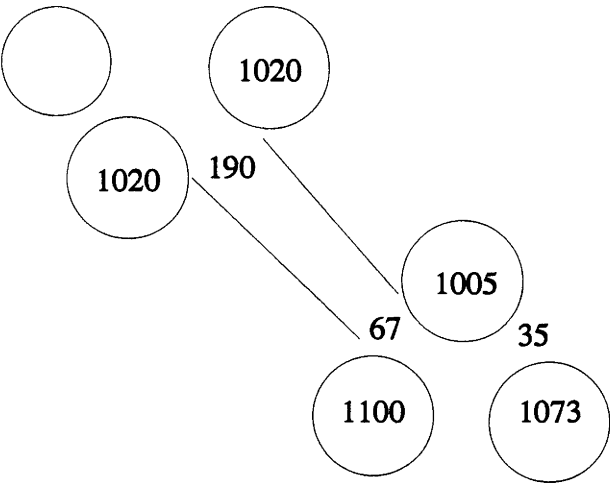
A3 Mill Settings and Roller Diameters - 1994 Crushing Season.
